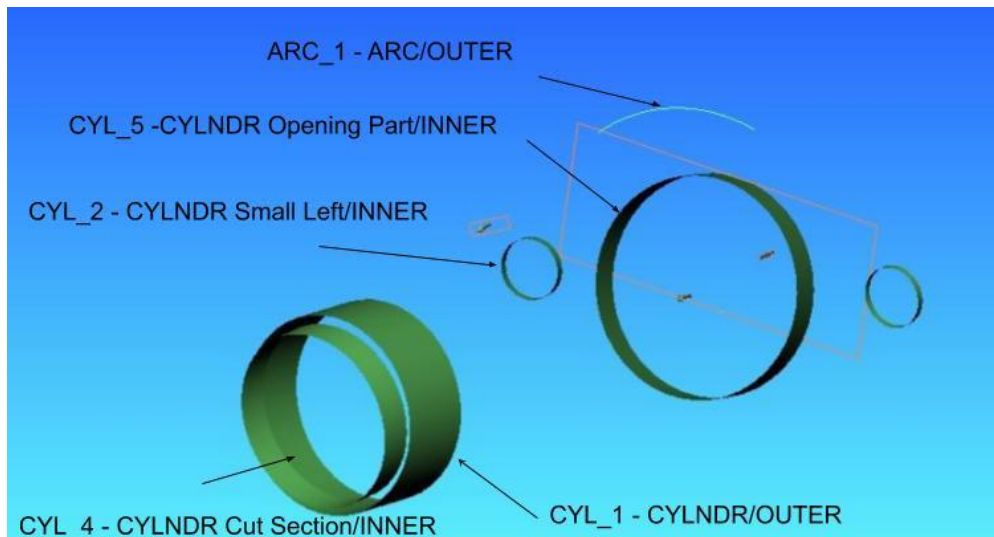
CAD Drawing Obtained from CMM for exhaust pipe
